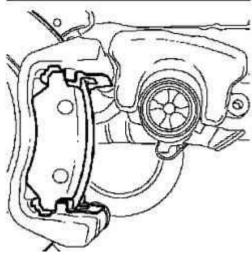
Install special tool to support team: 1 - caliper, 2 - adaptation
